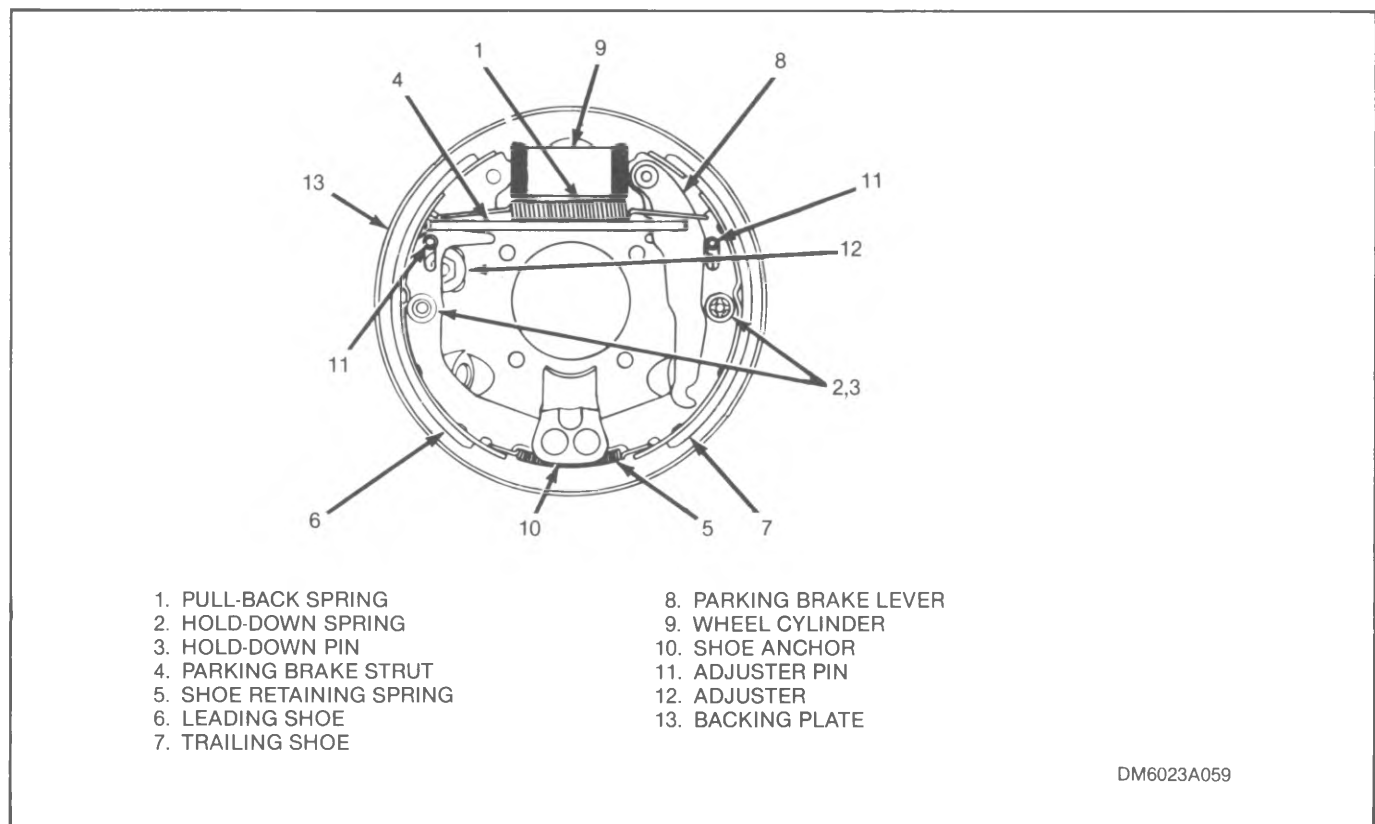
1976-79 Chevette Leading-Trailing Shoe Brake Parts
